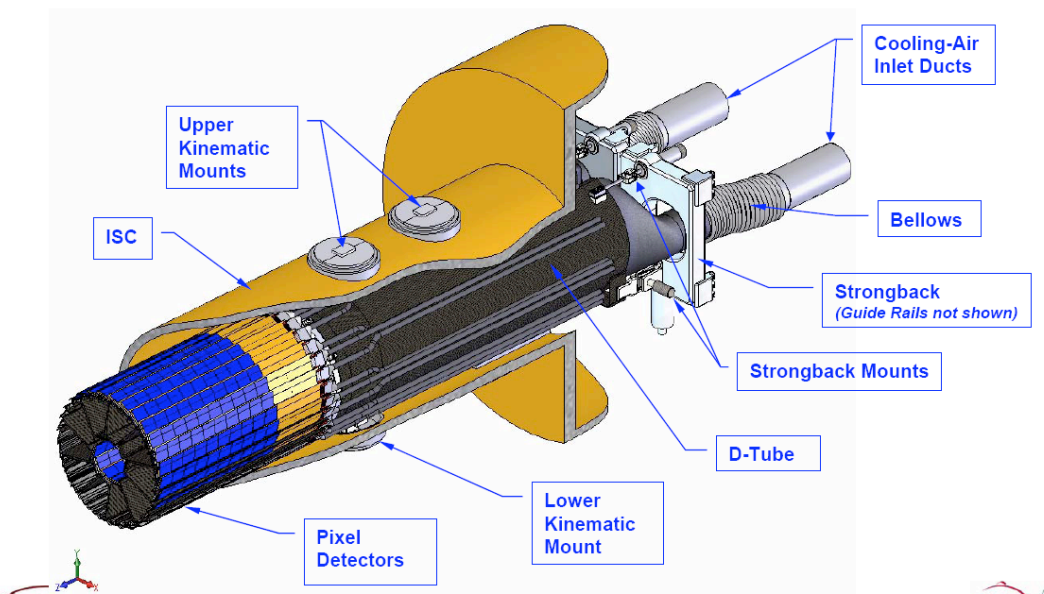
Detector assembly in the installed position supported with three kinematic mounts.
